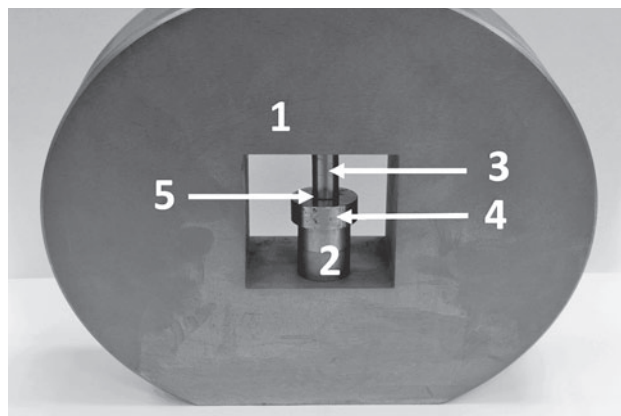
Jig for pressing the specimens, 1-frame of martensitic steel, 2 - internal element of the jig made of austenitic steel, 3,4 - specimens to be brazed, 5 - thin Ni base foil
